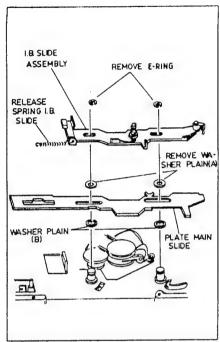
I.B Slide Assembly and Plate Main Slide Removal
